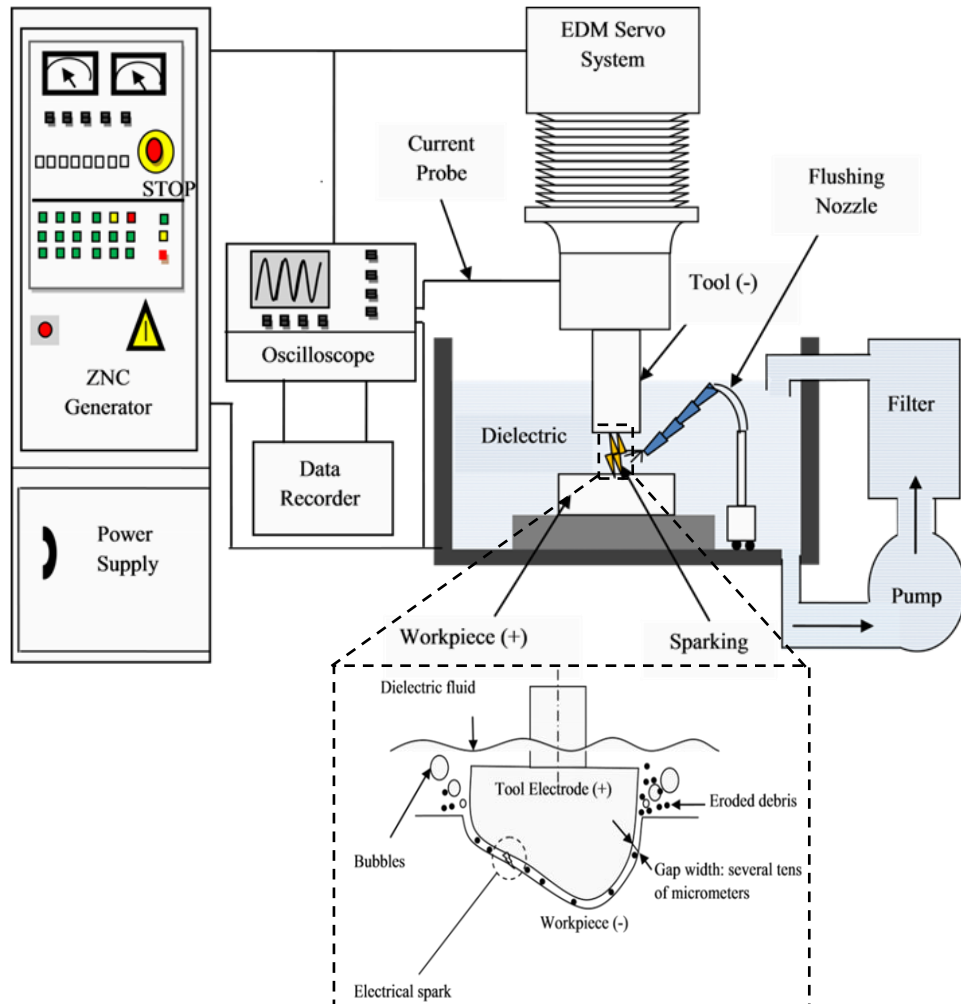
Schematic illustrated the mechanism of material removal in EDM process
